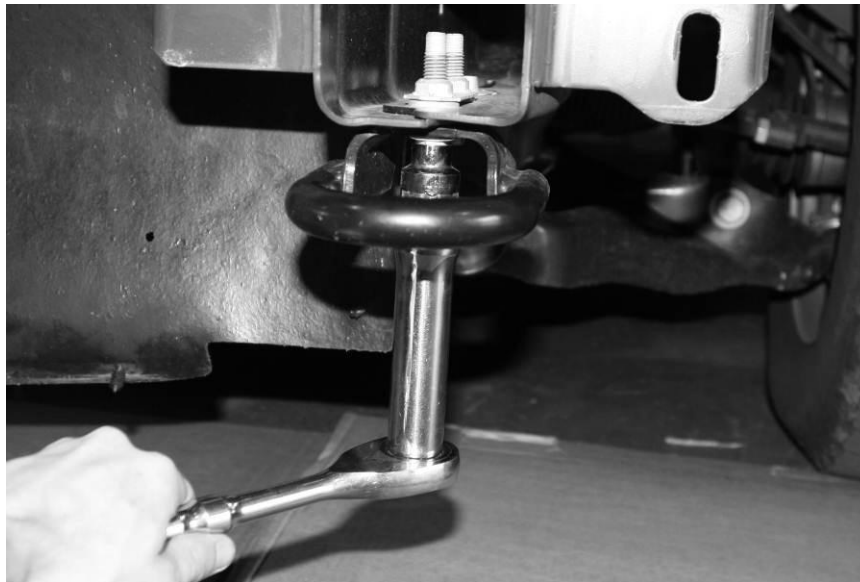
HOOD LATCH BRACKET FASTENER LOCATION
